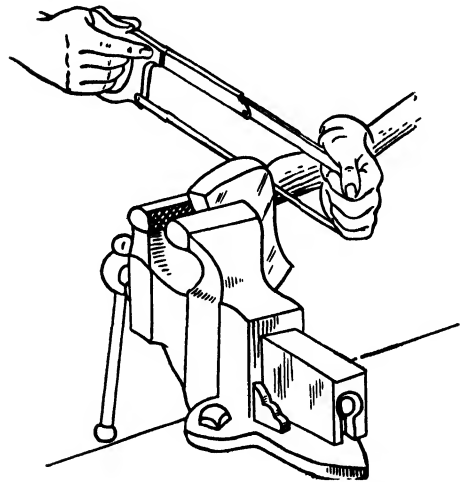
To remove a broken handle from an ax, first saw close to the head with a hack saw.
